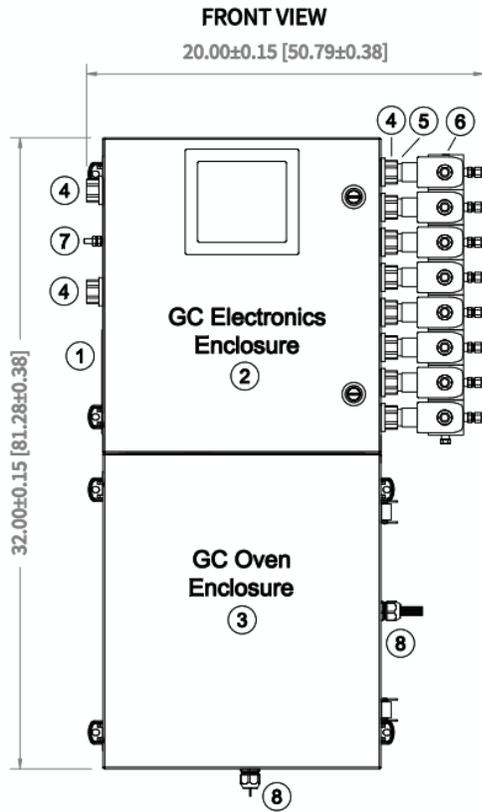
Model 131S External Components & Dimensions/Clearances Inches [cm]
